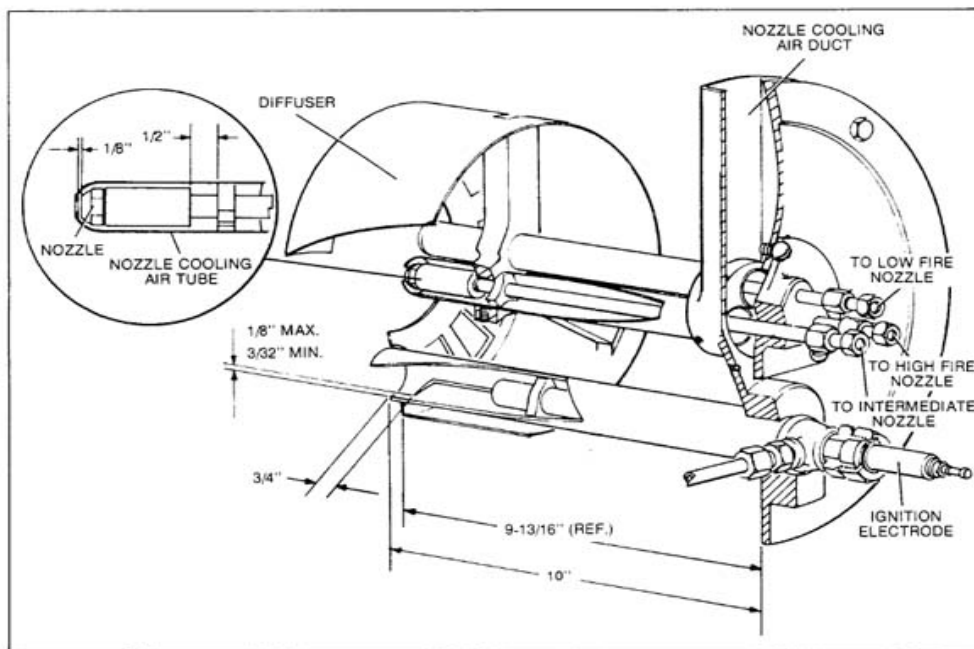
Oil Burner Drawer - Spark Ignition
